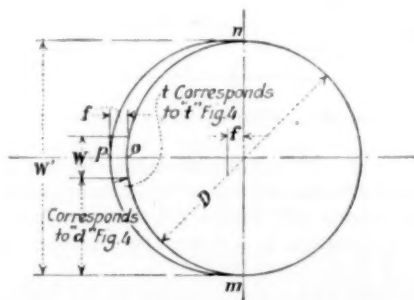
DIAGRAM REPRESENTING A FACE-MILL CUT
